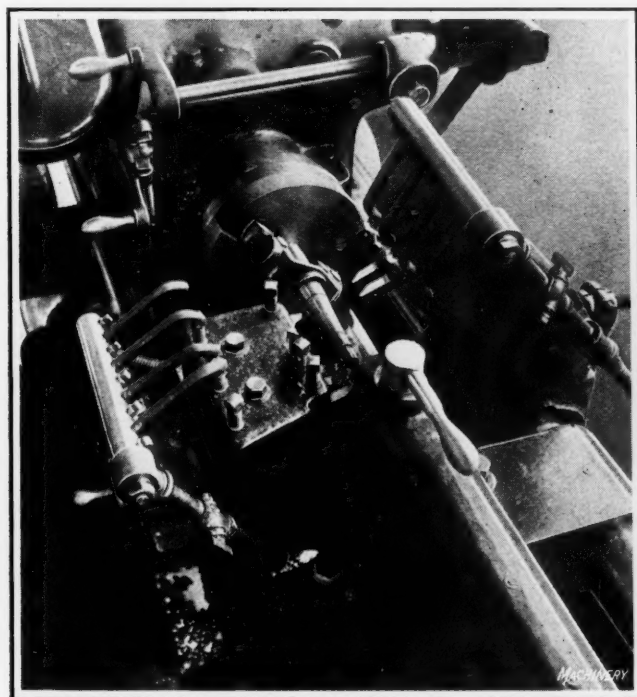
Automatic Lathe furnished with Necessary Tooling for the machining of a Steering Knuckle
